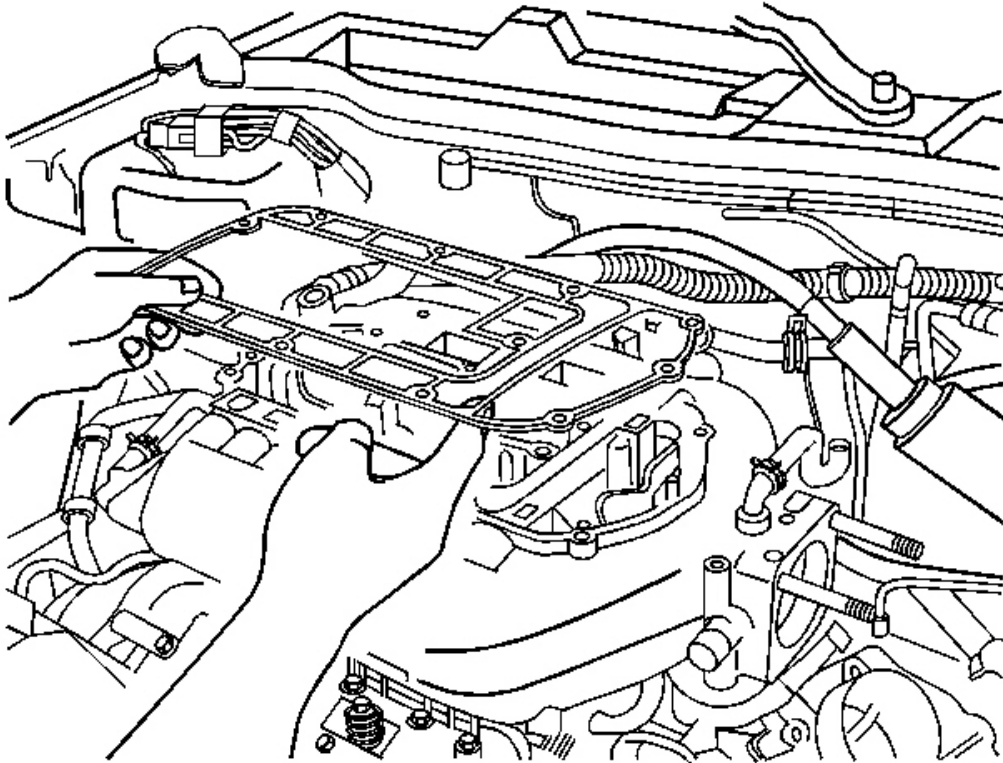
Identifying Intake Manifold Top Cover Gasket
